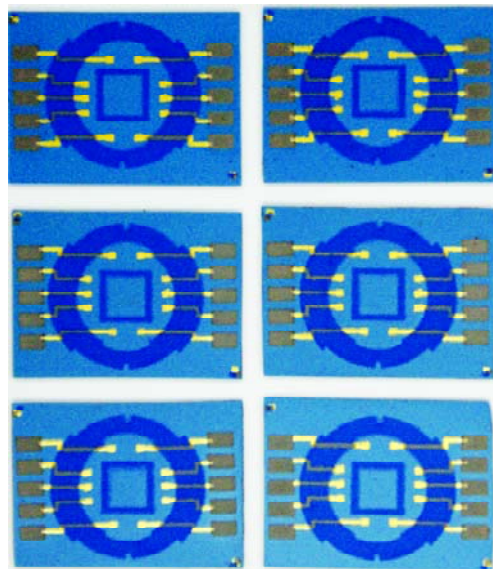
LTCC package for accelerometer with 10 I/O pins (without cavity)
